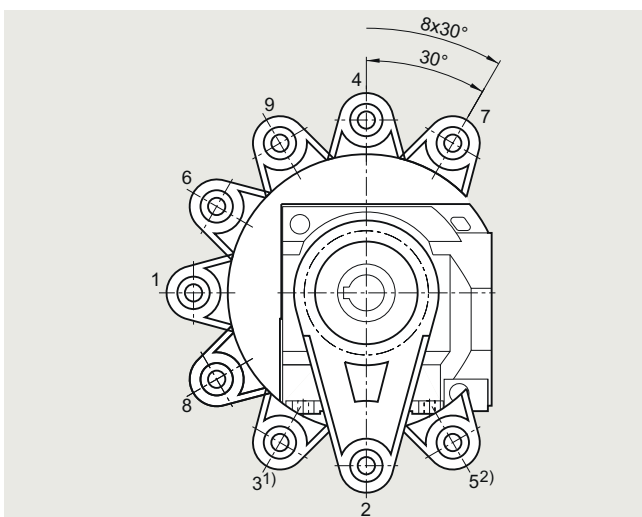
/10 Helical worm gearboxes CAD., Figure 1, sizes 39 to 89
